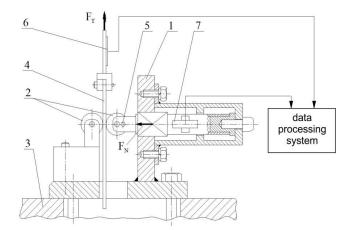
Schematic view of strip drawing test: 1 – frame, 2 – countersamples, 3 – base, 4 – specimen, 5 – fixing pin, 6,7 – load cell
